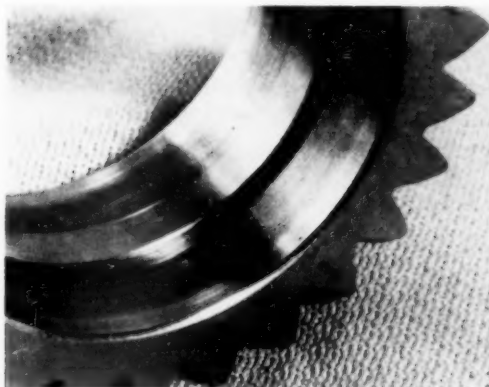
BRINELLED BEARING RACE IN HUP PLANET GEAR
